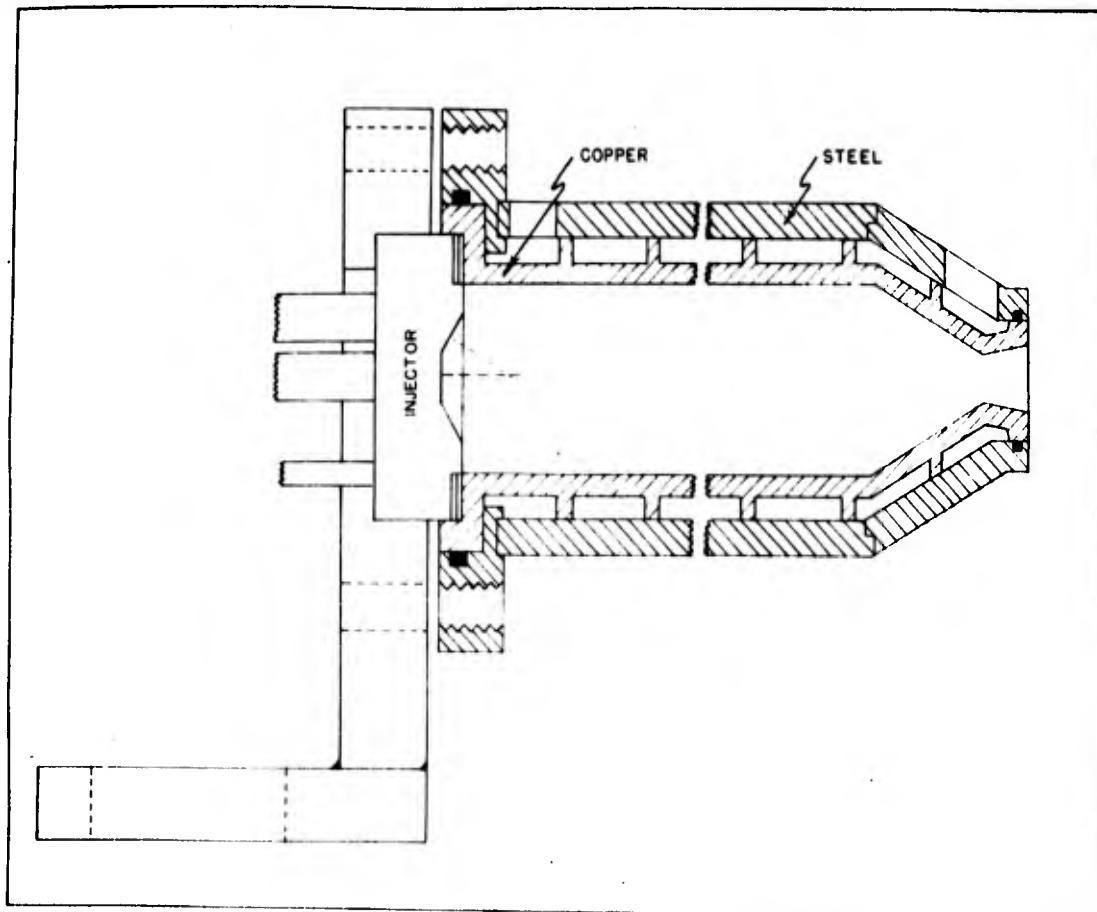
SECTIONAL VIEW OF THRUST CHAMBER
